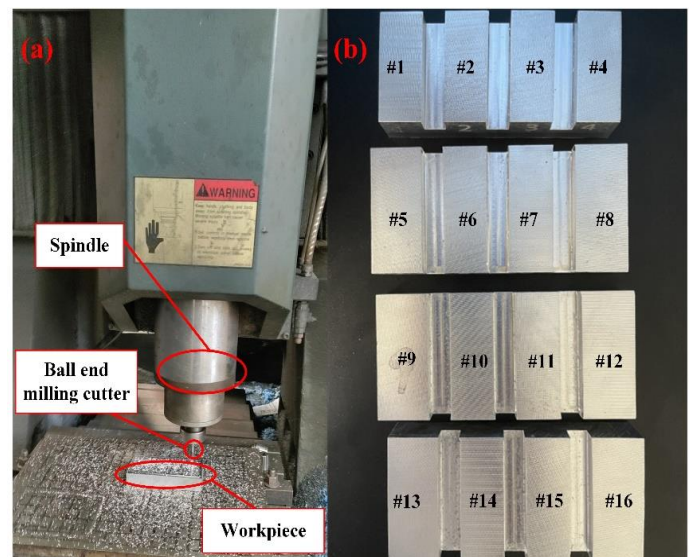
Milling site and finished workpieces:(a) Milling processing; (b) Workpieces after machining.
